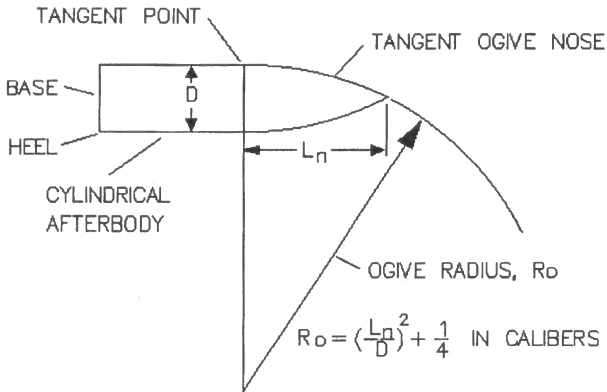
Drawing showing the geometry of a tangent ogive bullet shape.
